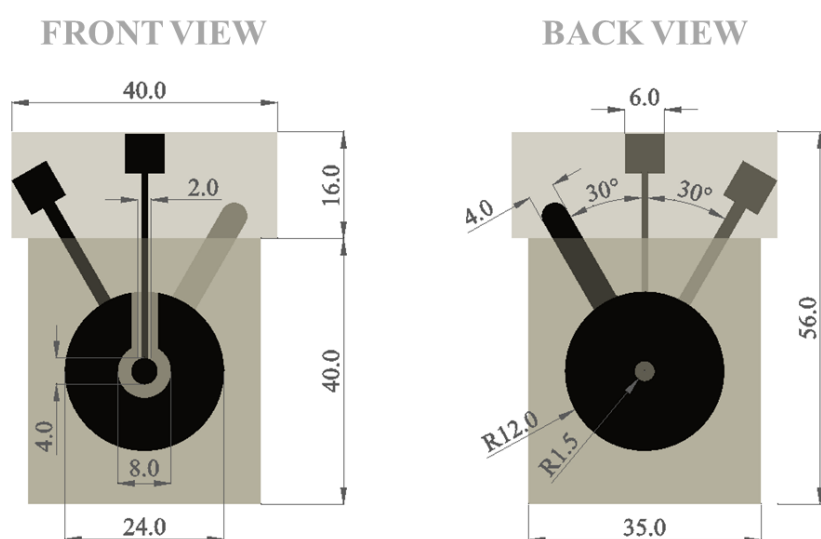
Dimensioned drawing of one permeable support depicted faceup (left-hand side) and facedown (right-hand side).
